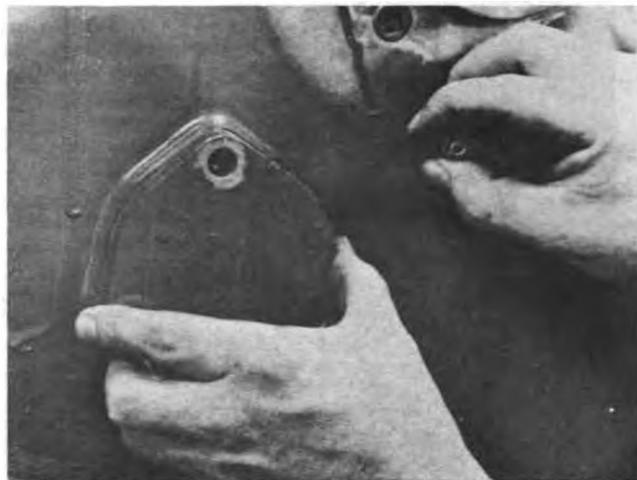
(N114268). Measure The Clearance For The Bearing Support.
